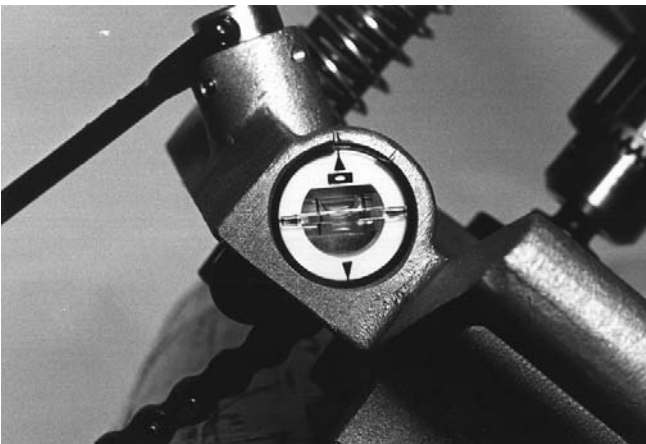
HC-450 Hole Cutting Tool Level Vial
